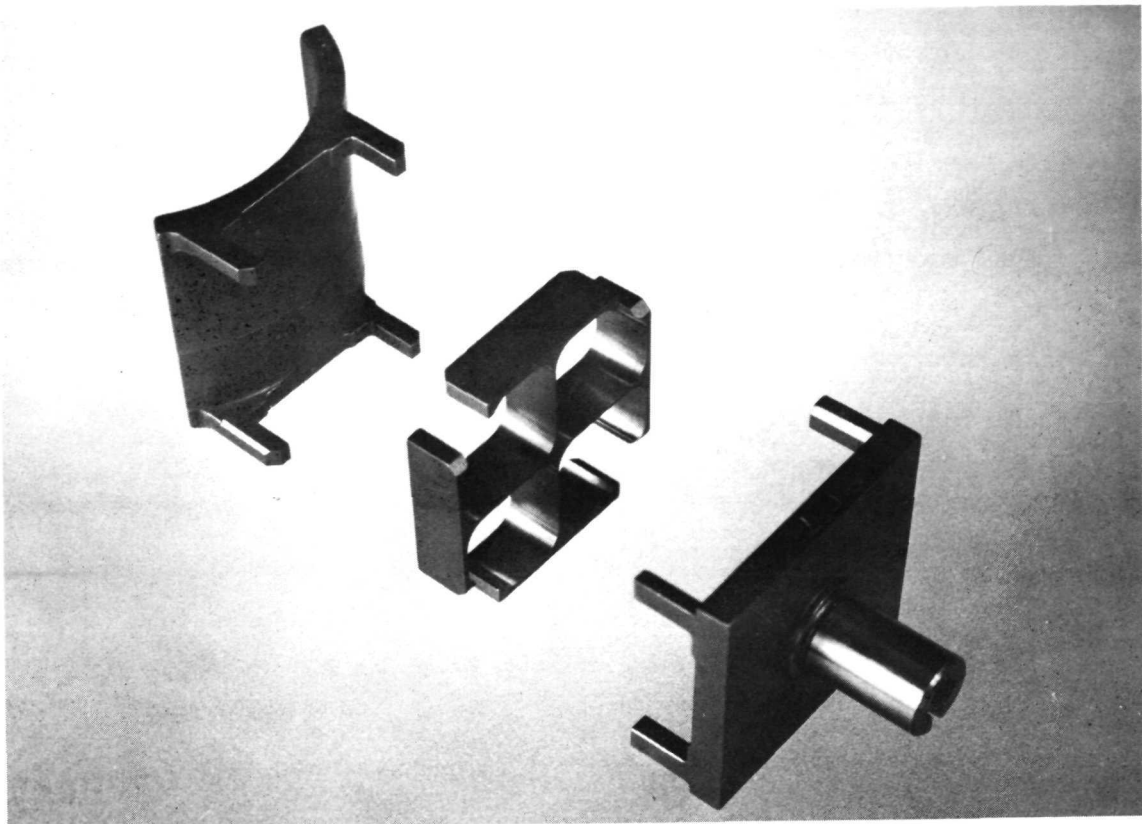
Modified, Cruciform-Supported, Tilting-Pad Bearing
